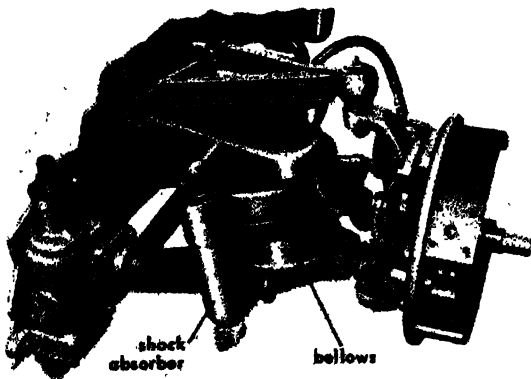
Left front piston-type air-bellows assembly. (GMC Truck and Coach Division, General Motors Corp.)
